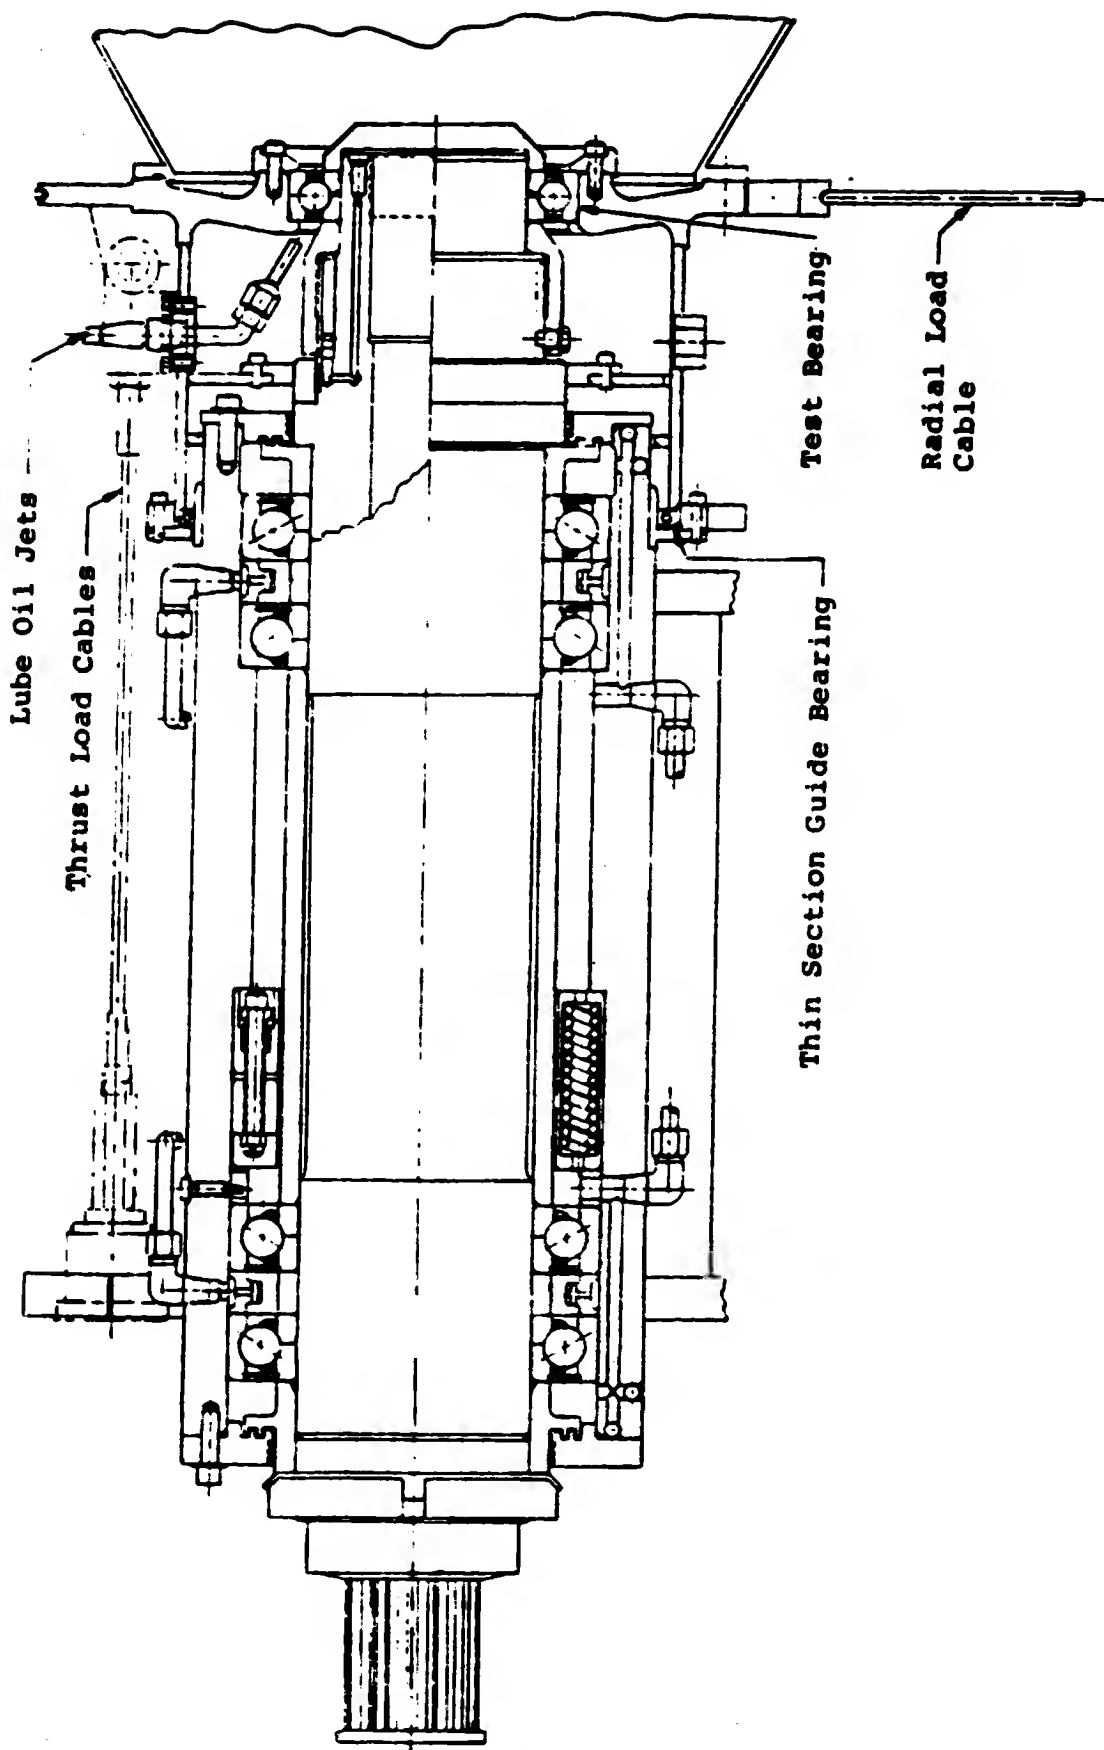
SCHEMATIC OF SHAFT ASSEMBLY
